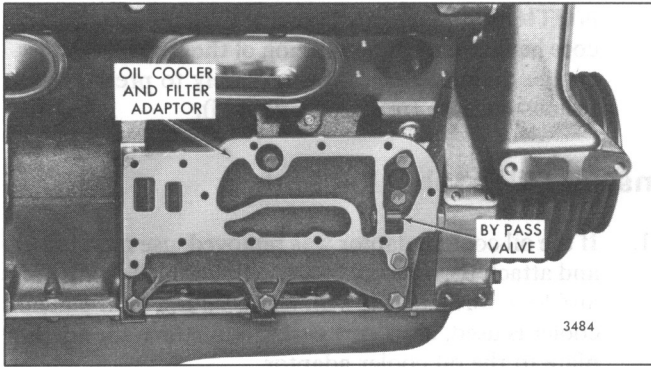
Oil Cooler Adaptor and Bypass Valve Mounting
